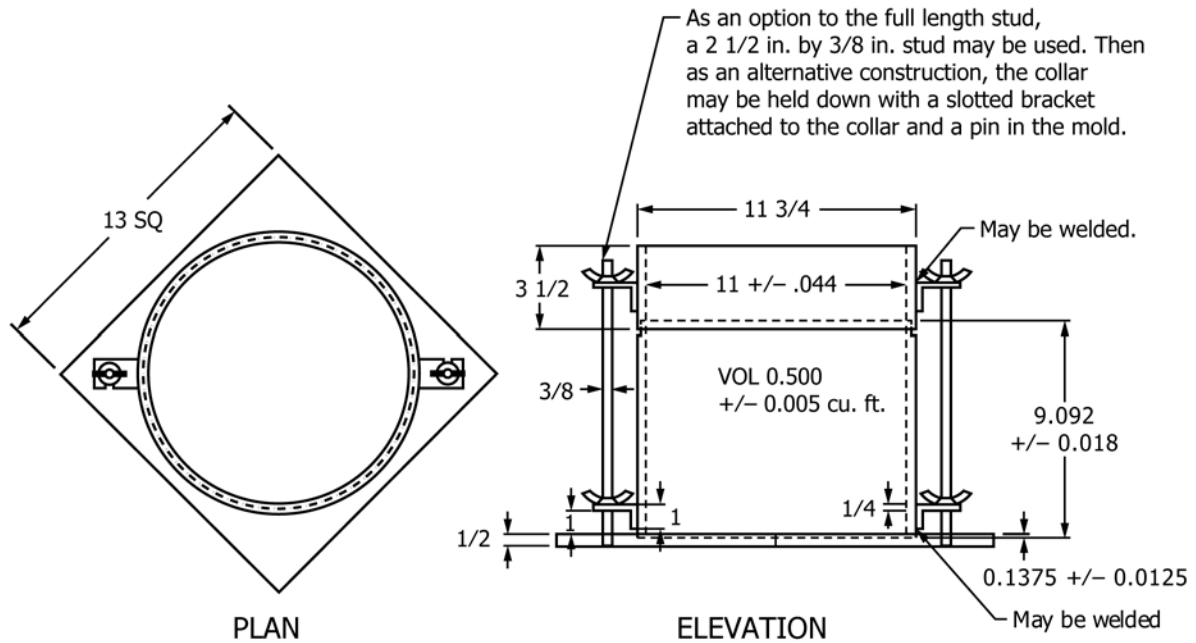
6.0-in. Cylindrical Mold (see Table 1 for SI equivalent dimensions)
